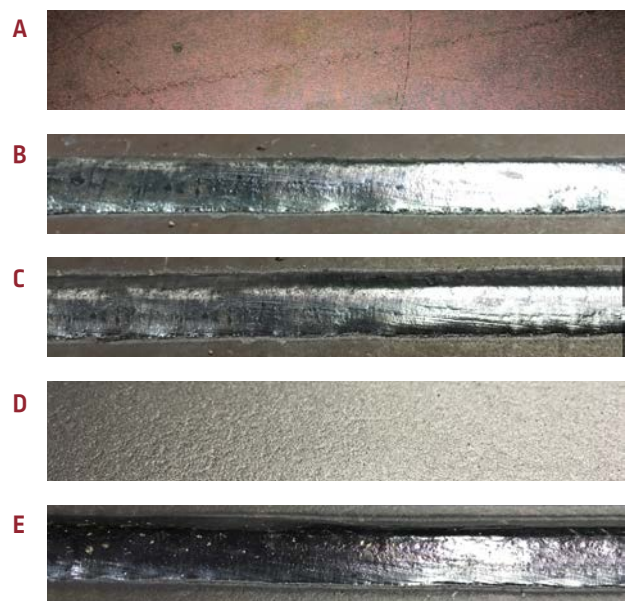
See A, Rusty Plate; B, Weld on Rusty Plate; C, Weld on Rusty Plate after Plate Was Pre-Heated to 400°F (204°C); D, Sand Blasted Plate; and, E, Weld on Sand Blasted Plate. By Power Brushing and/or Sand Blasting and Torch Heating, Even the Rustiest Plate Can Be Cleaned so that It Is Possible to Make a Good Porosity-Free Weld.
